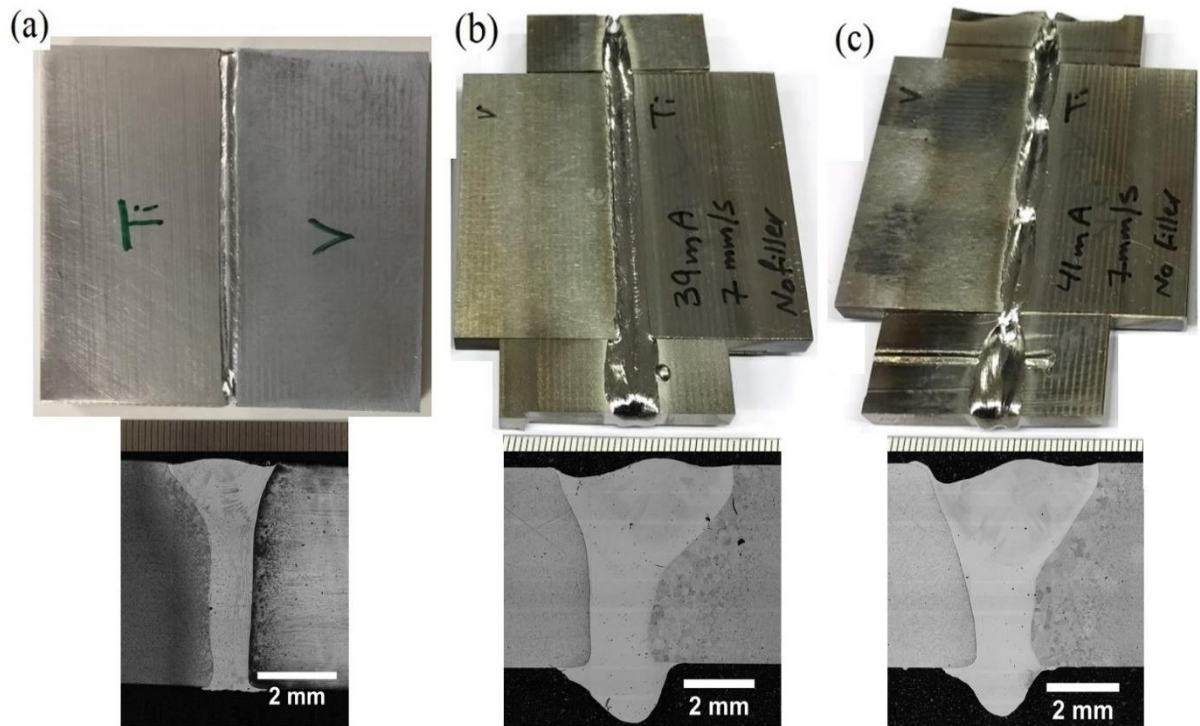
Optical images showing full penetration welding zones for three autogenous dissimilar welding joints of Ti-6Al-4V and CP-V at (a) AW01@37mA, (b) AW02@39mA and (c) AW03@41mA, all using 7mm/s beam speed
